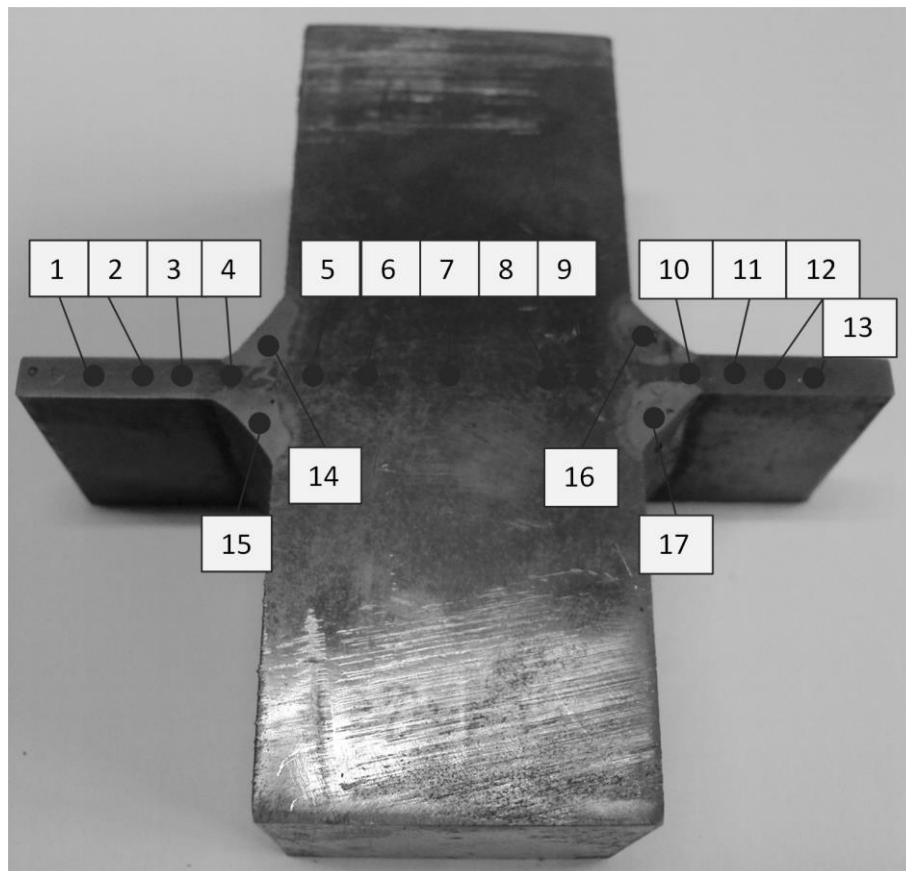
Hardness measurements performed in a W₃ welded specimens.
